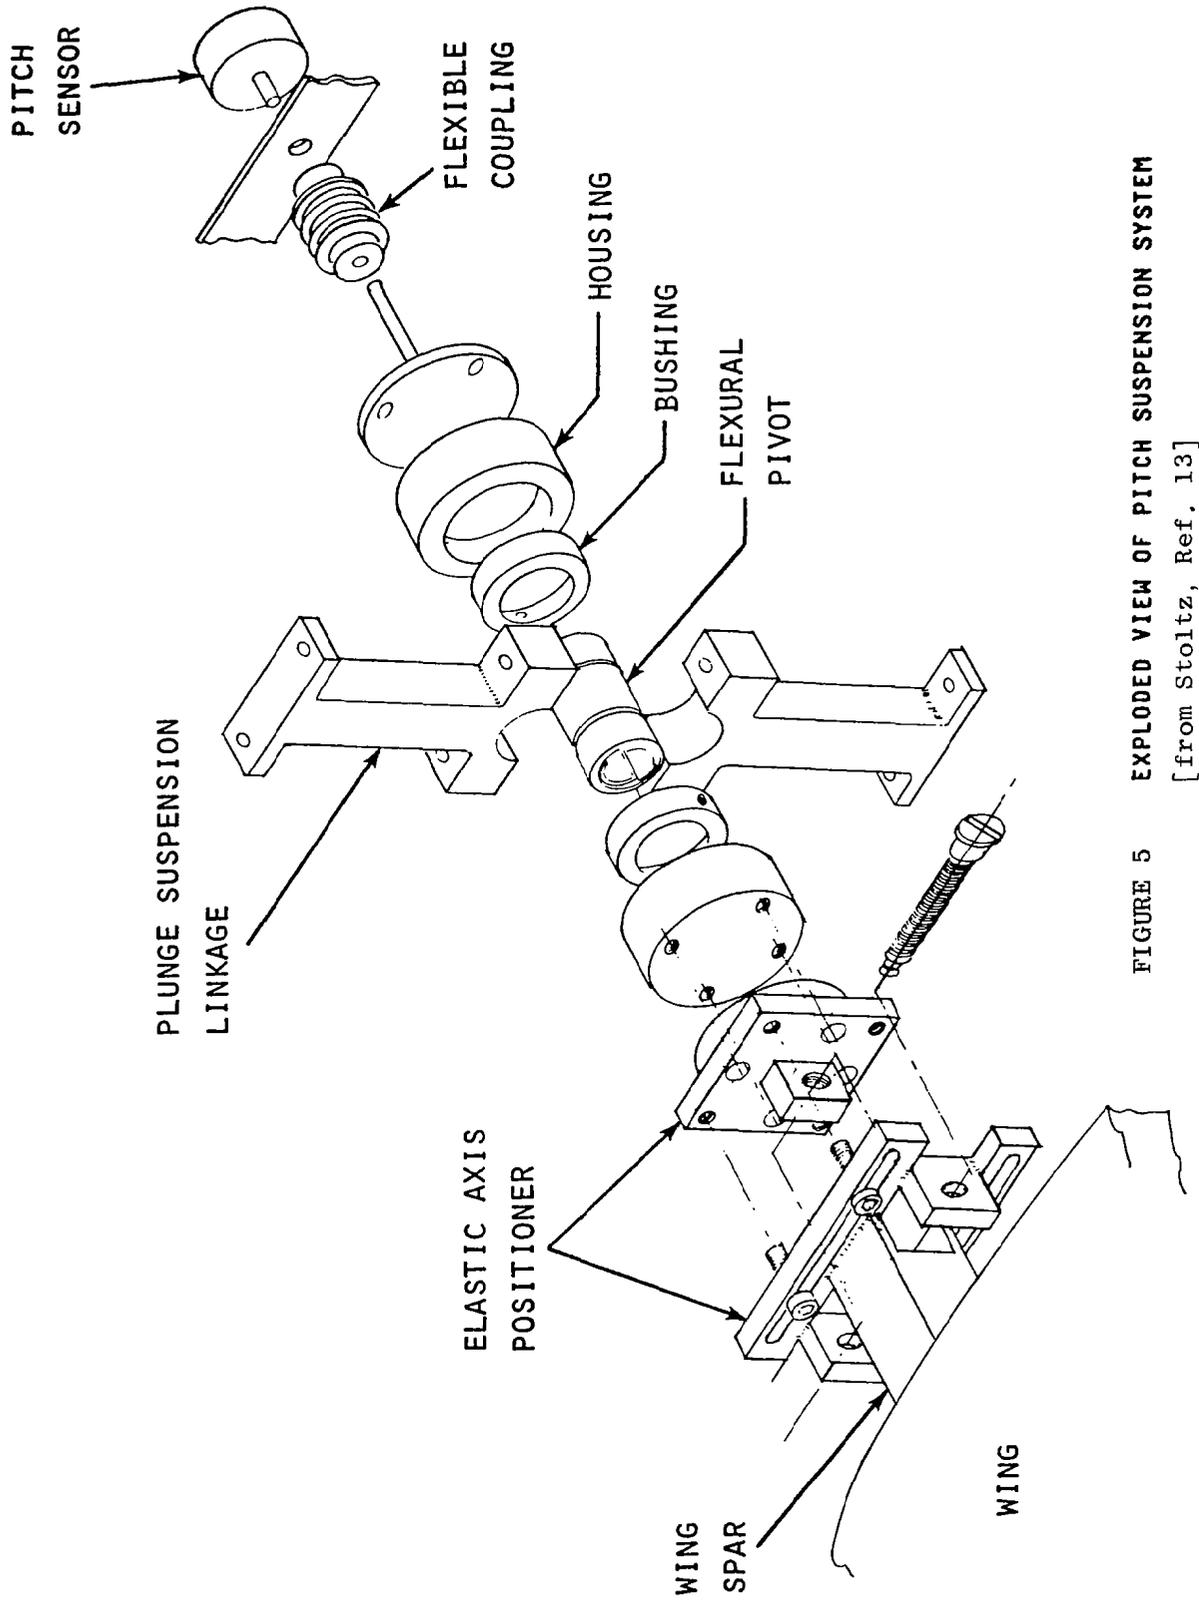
EXPLODED VIEW OF PITCH SUSPENSION SYSTEM
